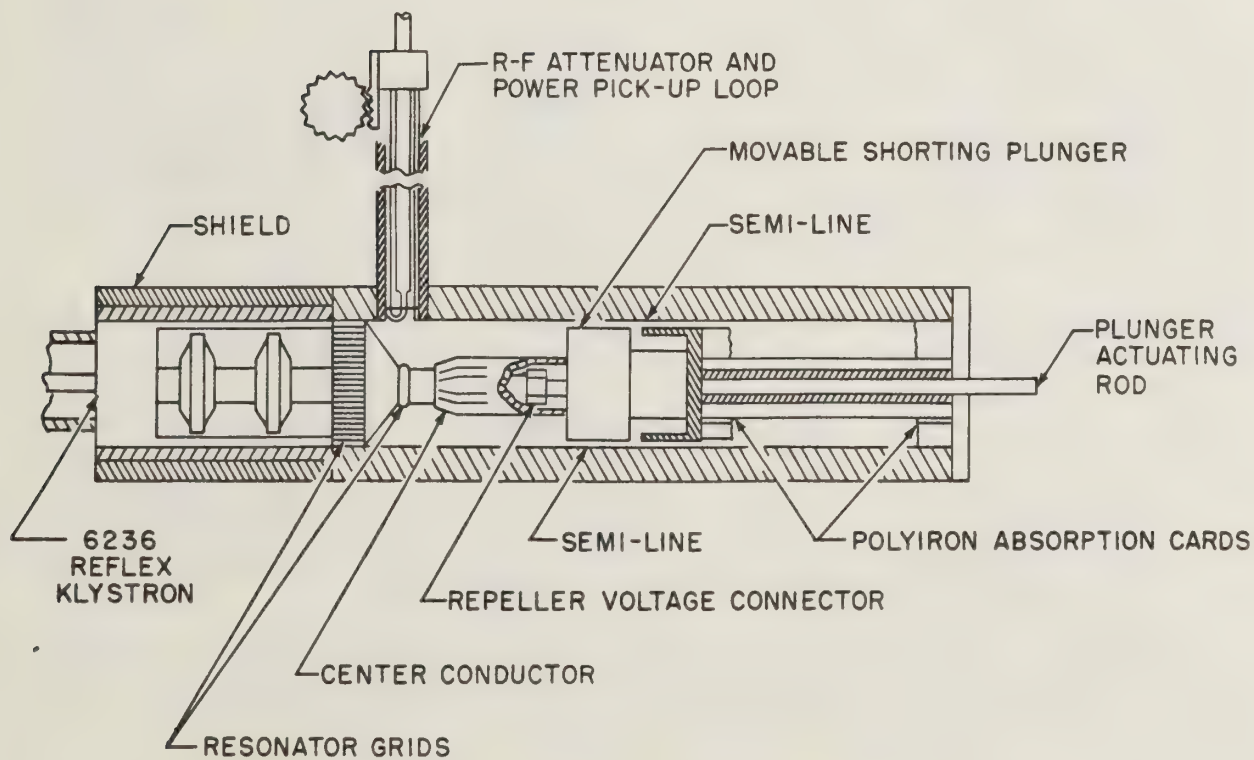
CUTAWAY VIEW OF R-F OSCILLATOR
